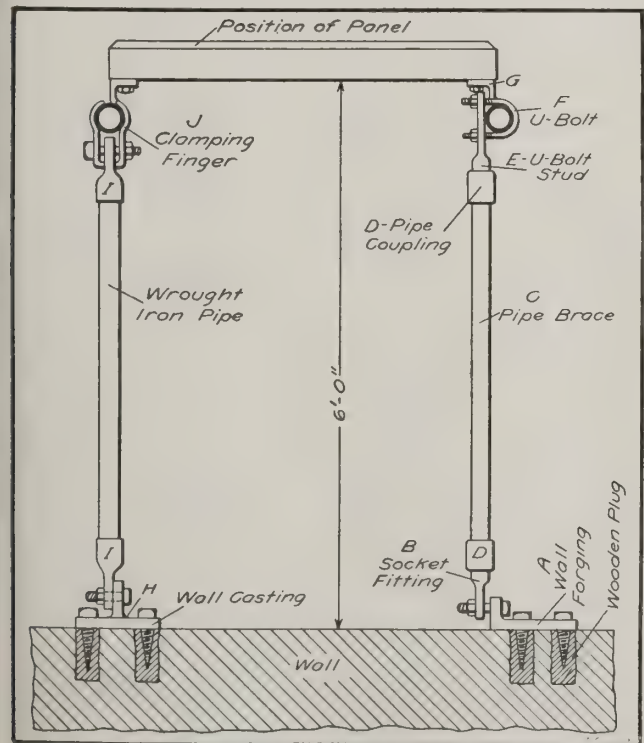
SHOWING ASSEMBLY OF FITTINGS FOR A PIPE SUPPORTED SWITCHBOARD.
